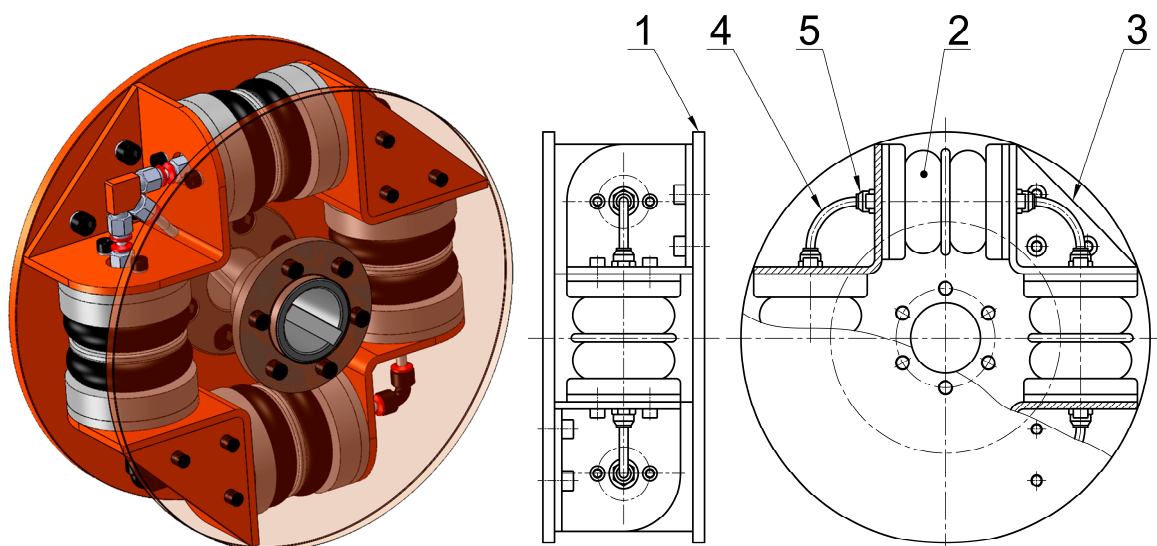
Pneumatic tuner of torsional oscillations type 4-2/70-T-C.
